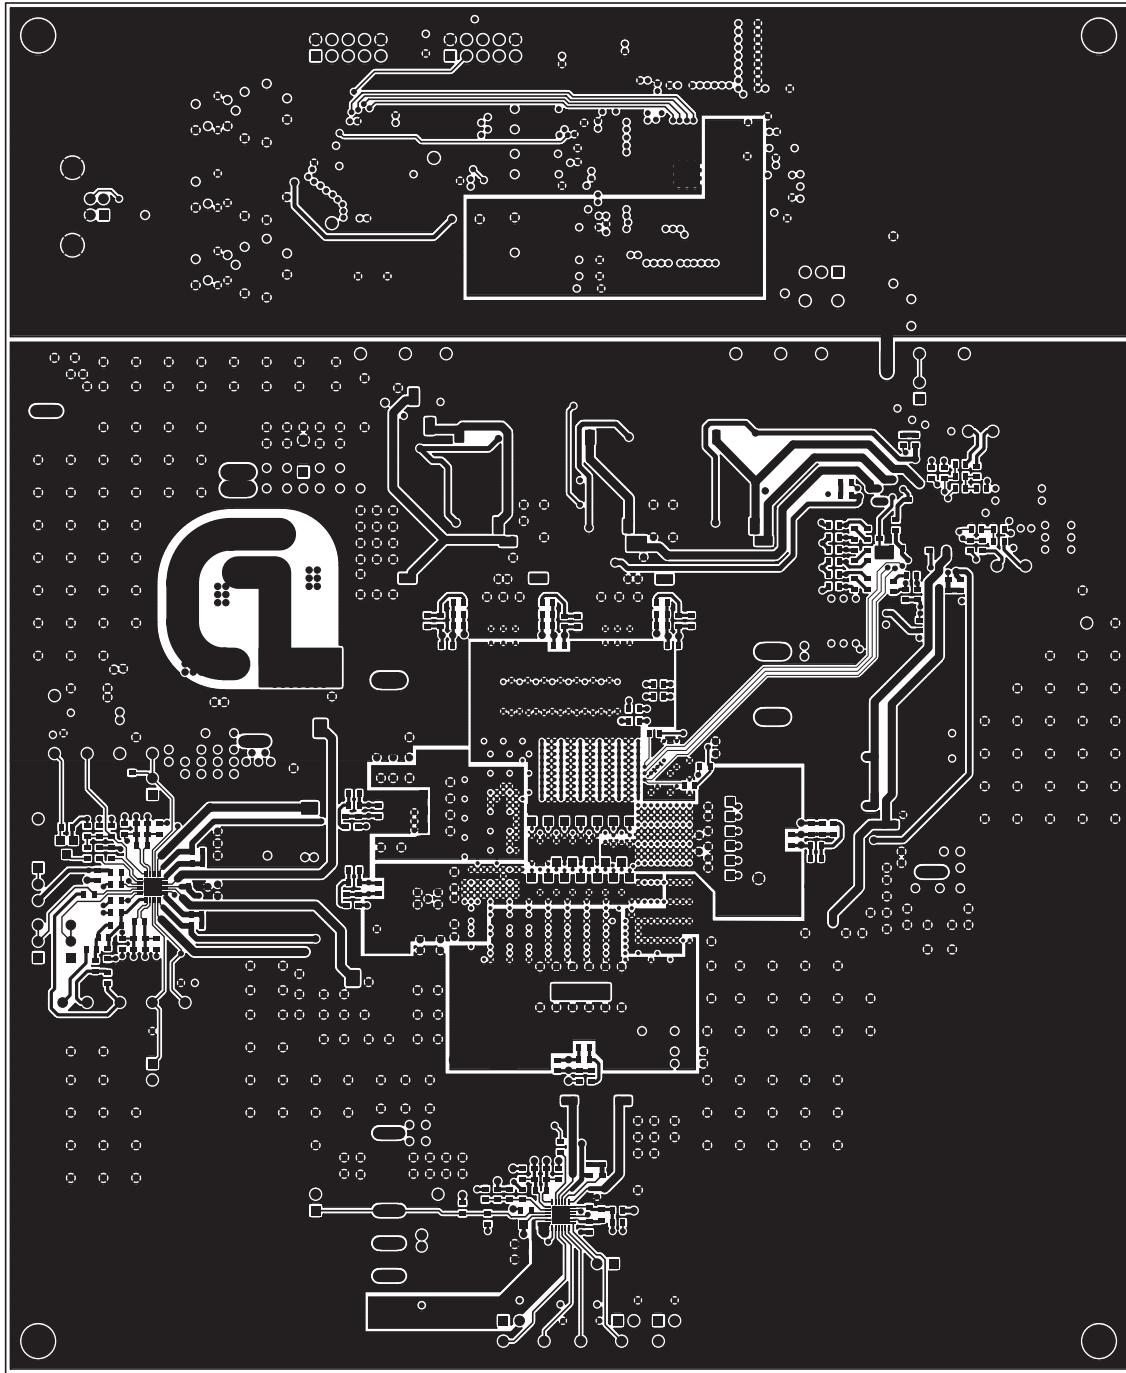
MAX17039 EV Kit PCB Layout—Solder Side
